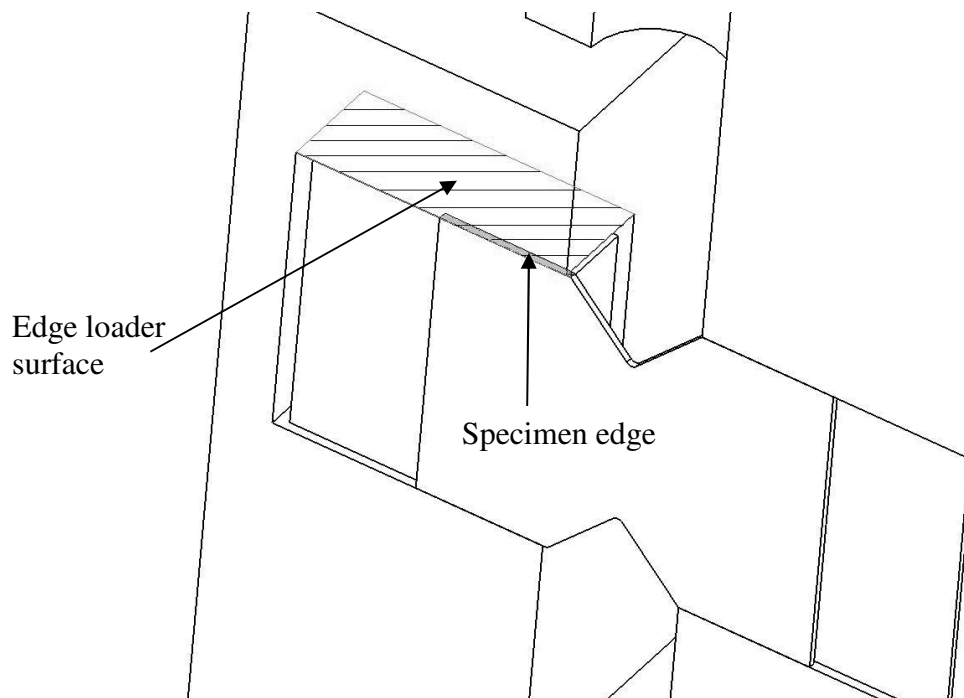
A detailed view of the edge loader and the specimen edge it contacts
